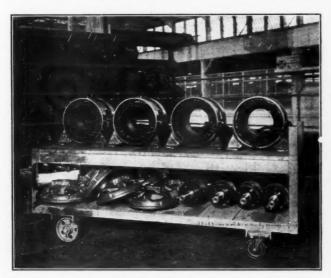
Truck for Handling Complete Motor Parts From Storage to Assembly Line
